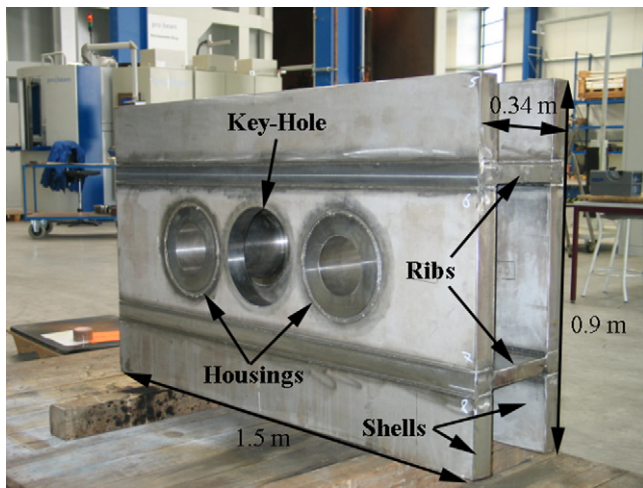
EB welded mock-up (back view). Dimensions: 1.5 m × 0.9 m × 0.34 m.
